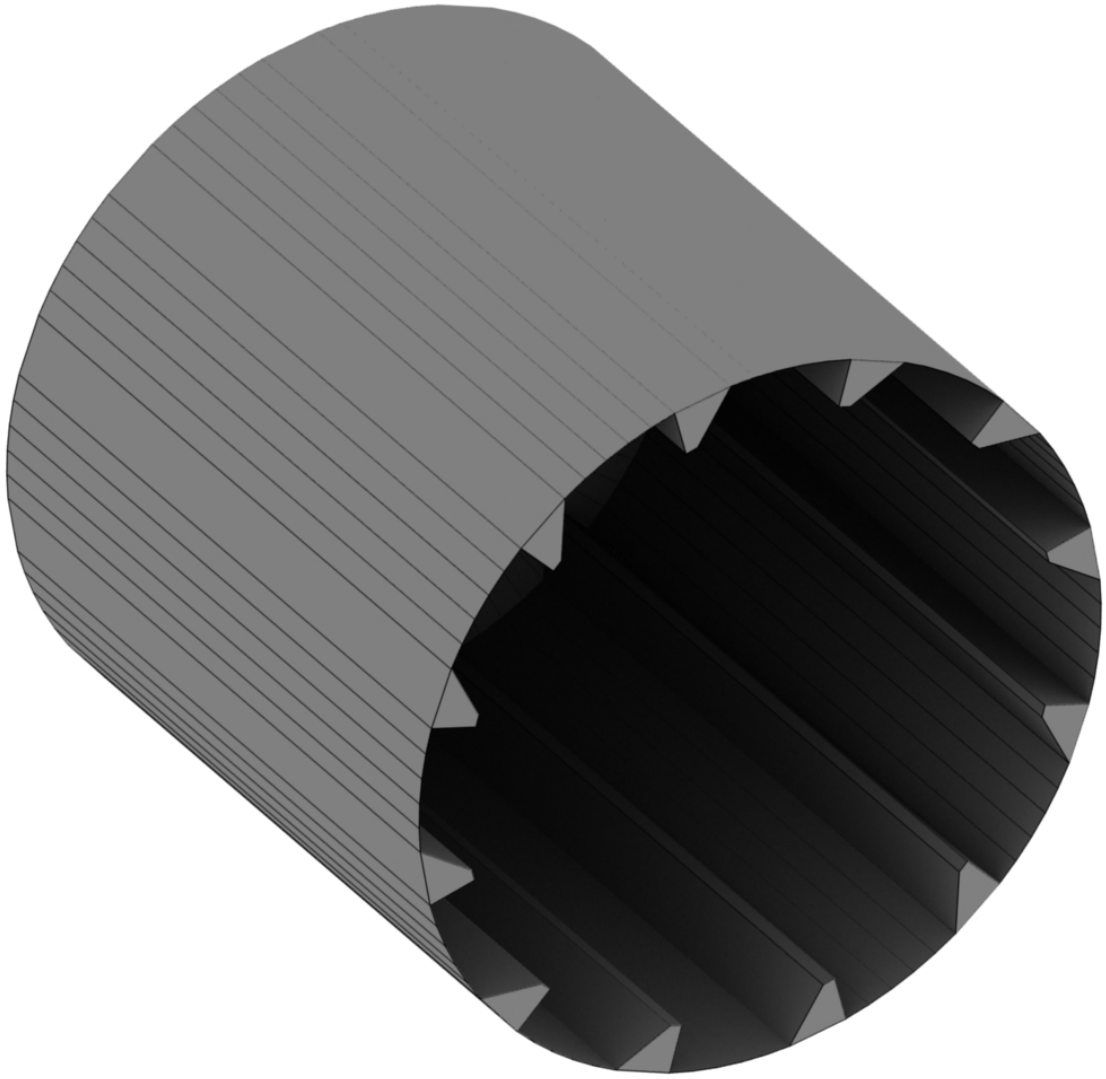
Isometric view of the 12 cm mill surface mesh without the front wall
